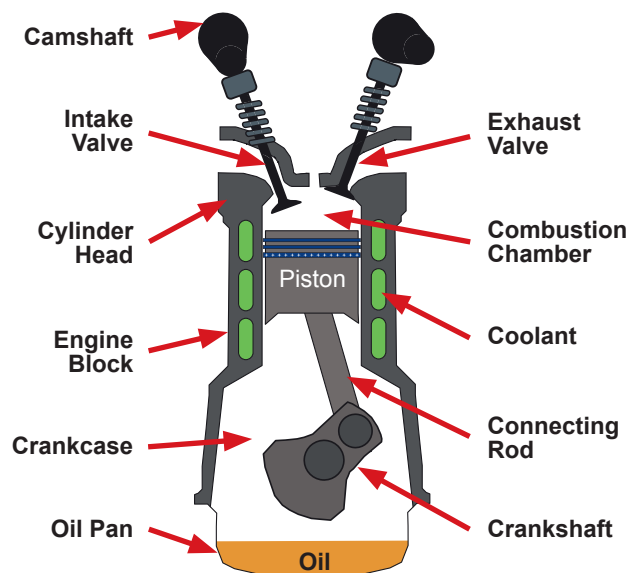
Dual Overhead Camshaft (DOHC) Engine
